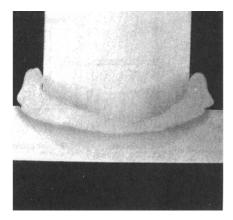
Macrosection of low-carbon steel stud weld. Source: Ref 4.3
